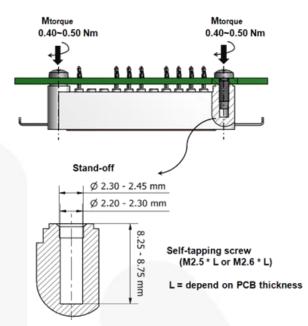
Screw Clamping on Stand-offs and Key Dimensions of Screw Hole
